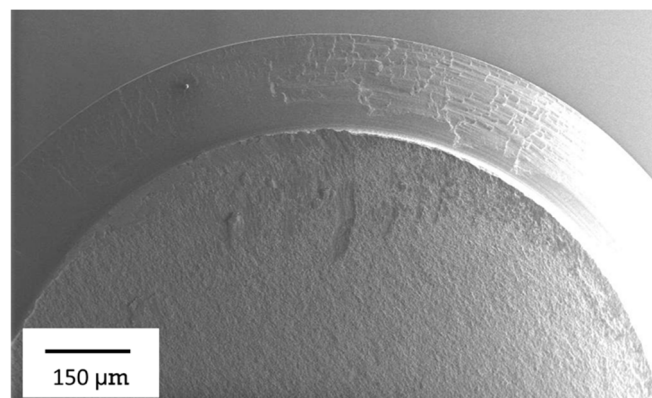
SEM-SE micrographs of multiple crack initiation sites in notched specimen. The outermost zone of the fracture surfaces of the specimen was partially damaged by the final stage of fracture.
